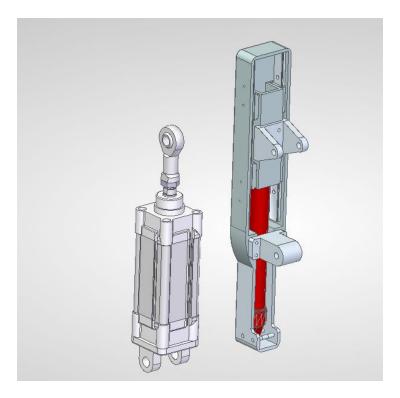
XL-063-80 pneumatic cylinder next to the old suspension module.
